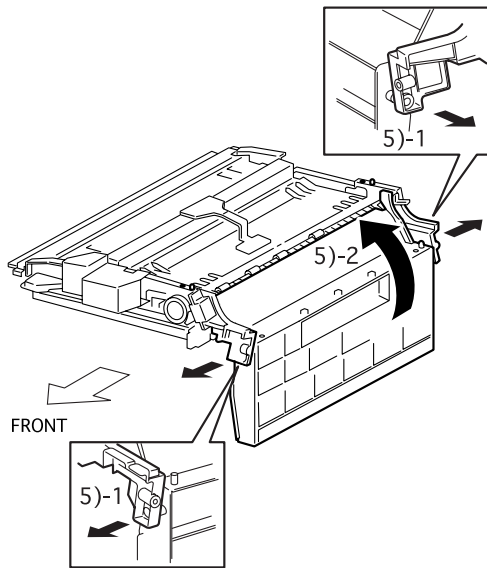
PRE-REGI. CHUTE ASSEMBLY Removal
